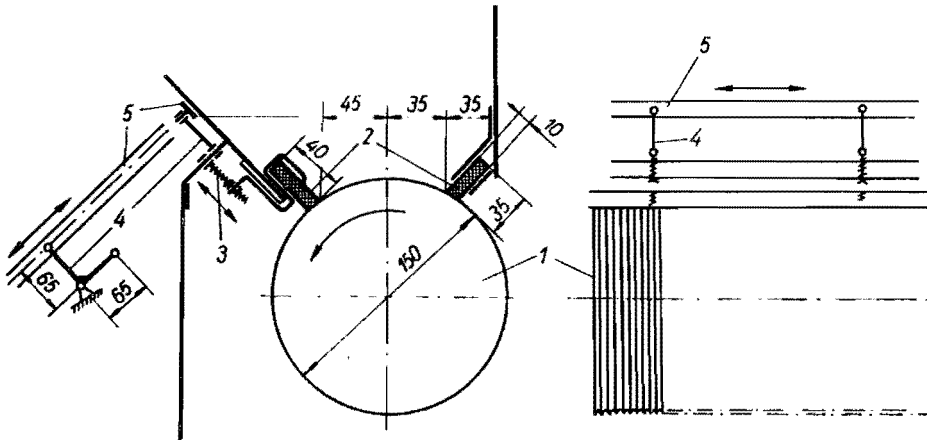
Example of a seeding unit for sowing grass seeds: 1—grooved surface tube; 2—felt inserts; 3—adjusting screw for precision control of the sowing groove; 4—lever system for adjustment of seeding rate (width of sowing groove); 5—slat located over the length of the seed box.
